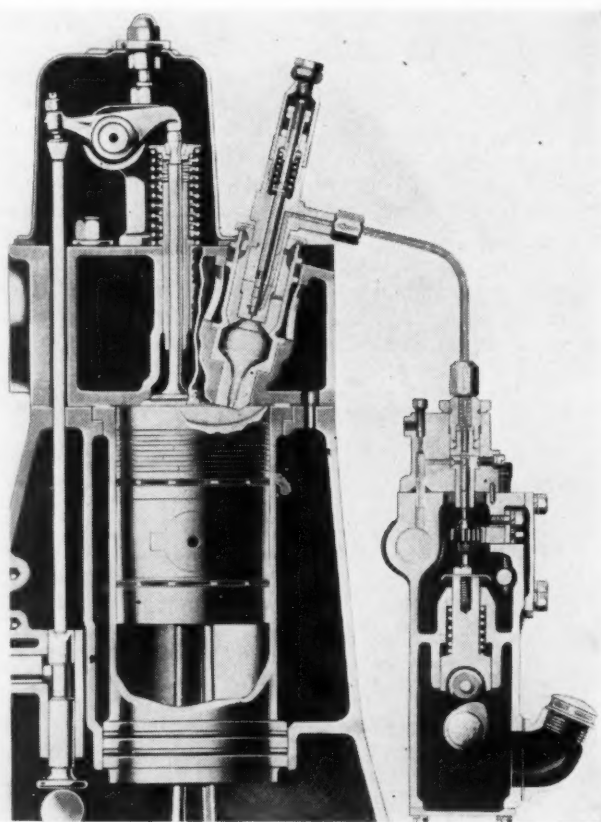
PRECOMBUSTION-CHAMBER DIESEL ENGINE SHOWING FUEL-INJECTION SYSTEM AND COMBUSTION CHAMBERS
